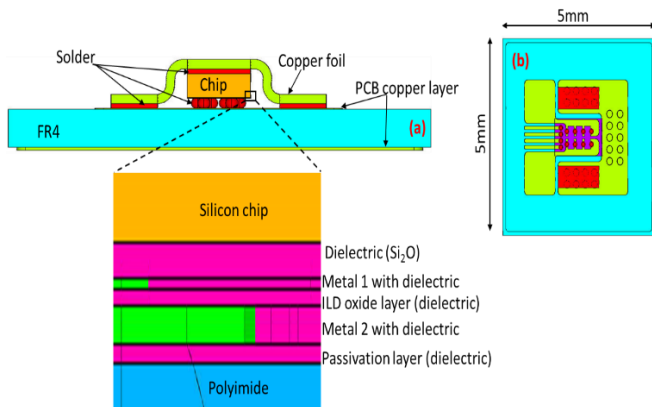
(a) Layout of the LIGBT package in side view, (b) top view of the package
